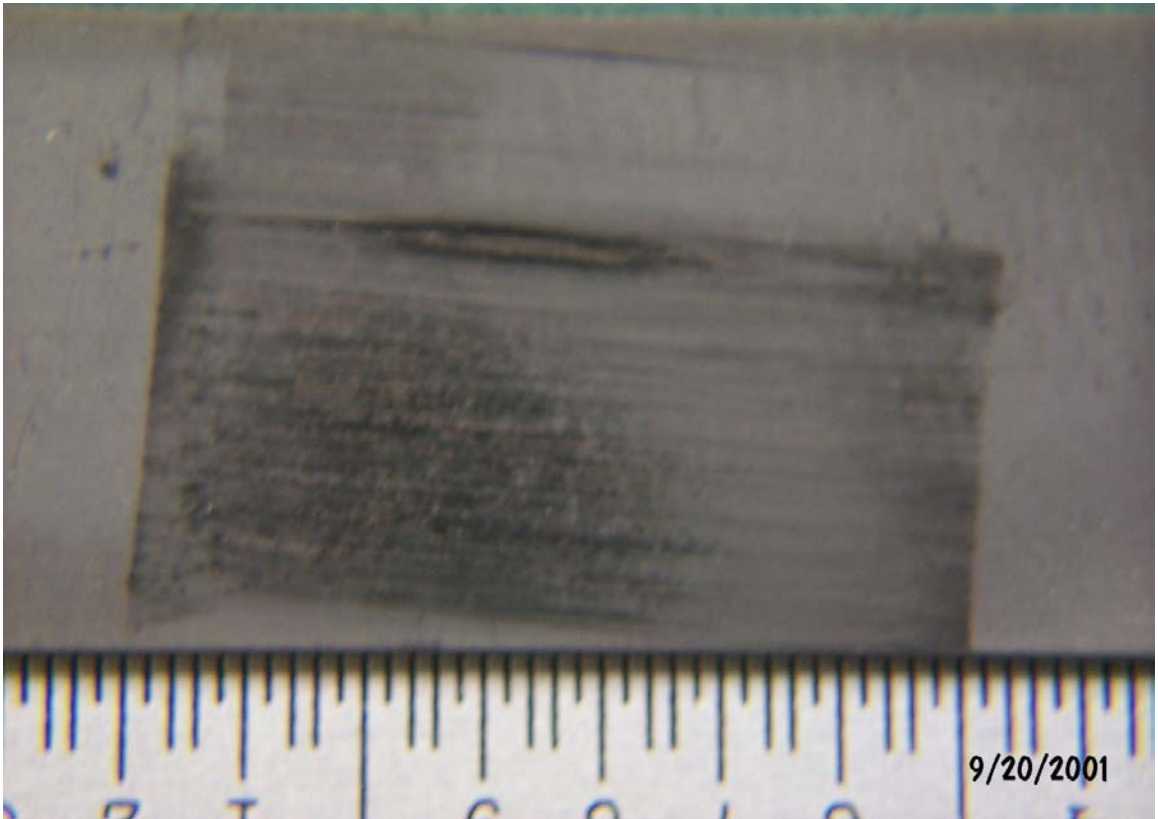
MoST coated A2 tool steel after 100 cycle test with severe coating removal
